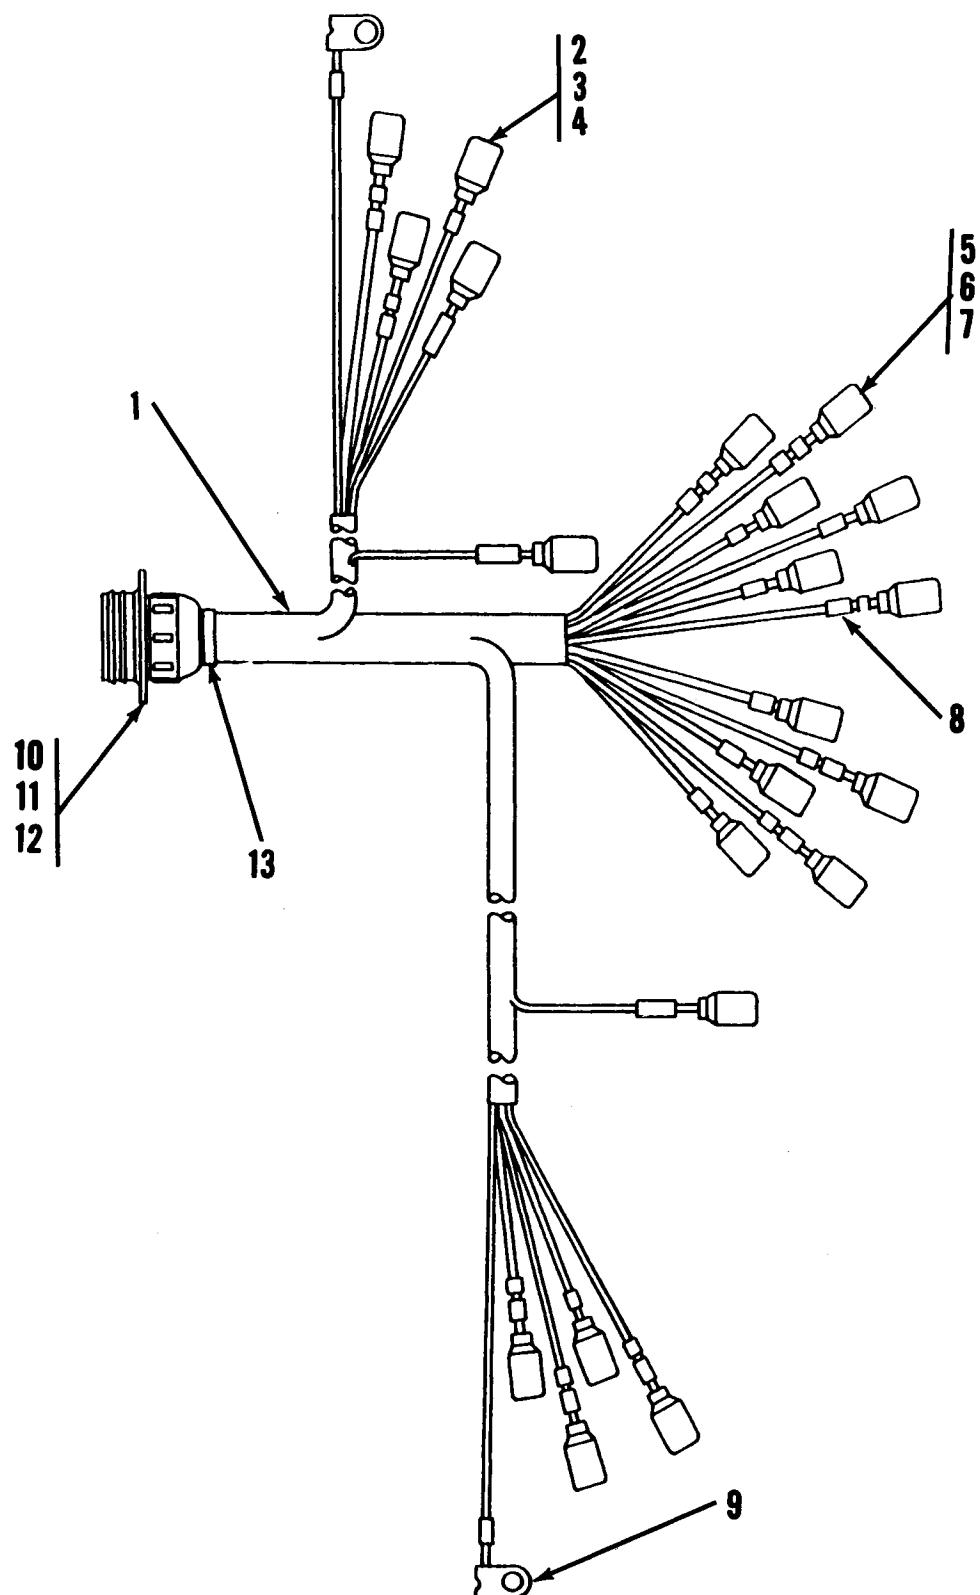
A. Wiring Harness, Dolly Taillights, XM991E1,
